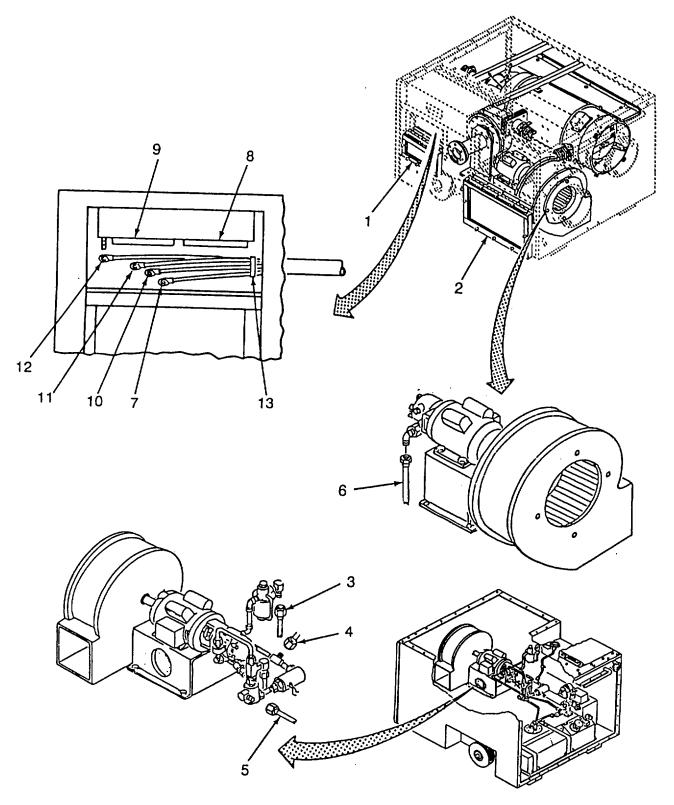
Fuel Pump and Solenoid Valve Removal (Sheet 1 of 2)
